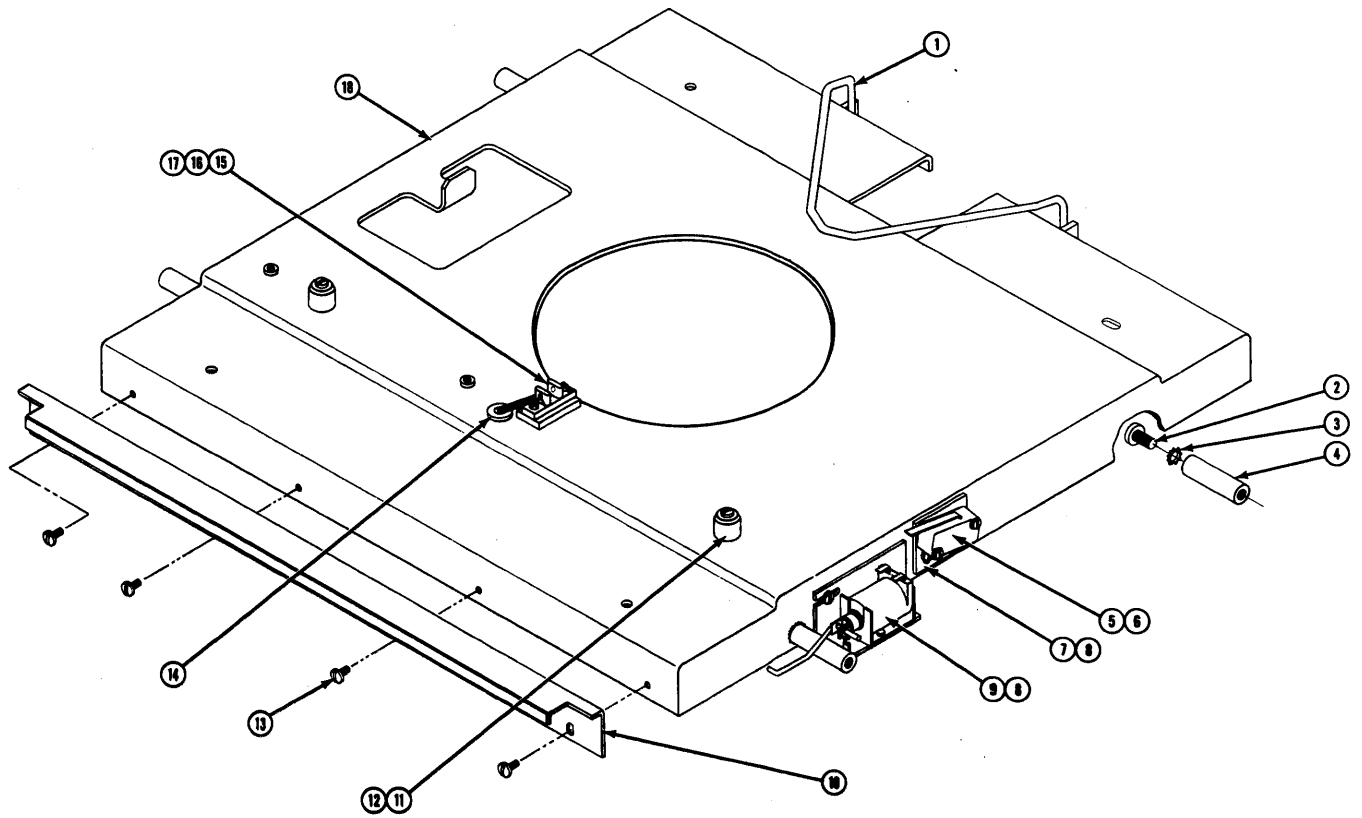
Fixed Disc Cover Assembly (73180), Right Side
